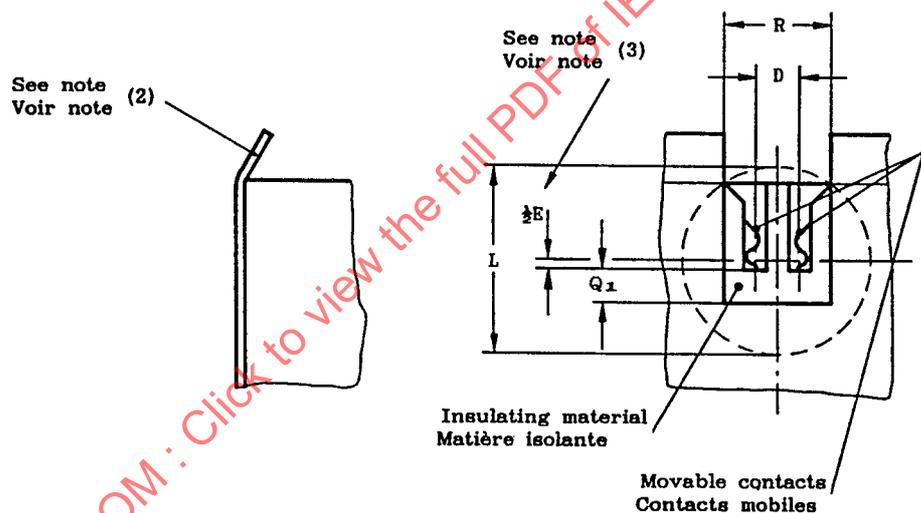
CONTACT ASSEMBLY WITH PARALLEL SLIDE-IN GROOVES
